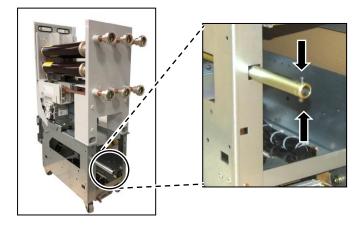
Coupling pin of the operating shaft at the contactor truck
